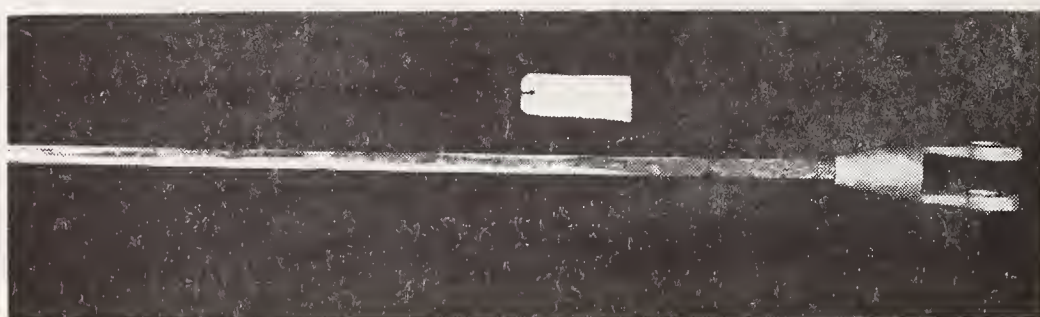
Upper end of Rod X16 showing severe carbonaceous tracking and charring. See, also, Figures 17 and 18.
